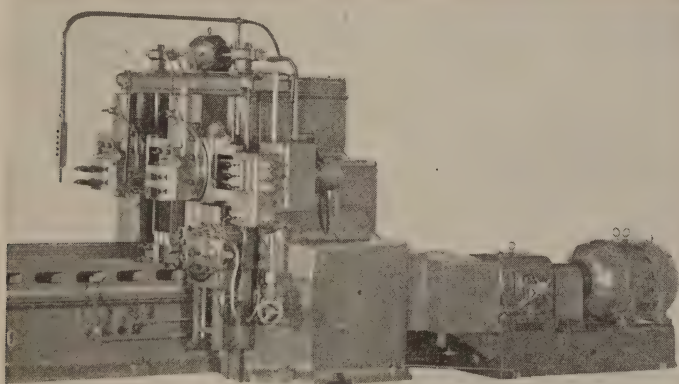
A modern hydraulic planer with four heads. The pump-driving motor, the Oilgear pump and the oil reservoir are shown at the right. (Courtesy of The Rockford Machine Tool Company.)
